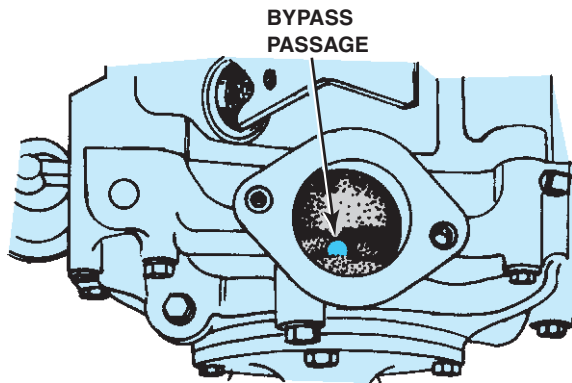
This internal bypass passage in the thermostat housing directs cold coolant to the water pump.
